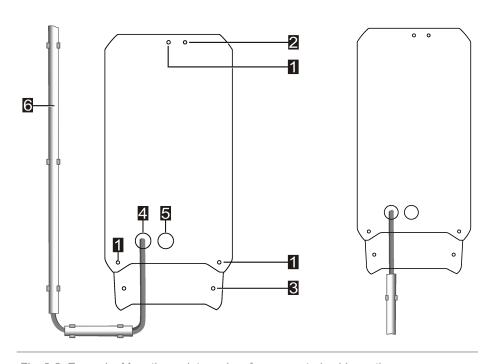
Example: Mounting points and surface-mounted cable routing
